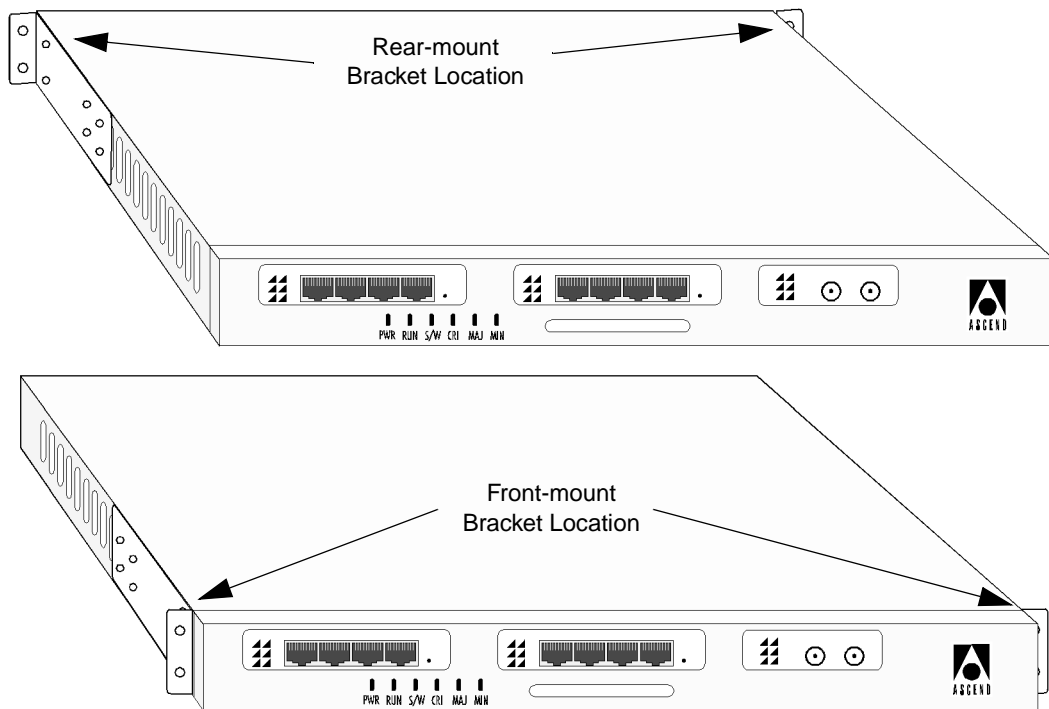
Front- and Rear-mount Bracket Locations (19-inch Brackets Shown)
